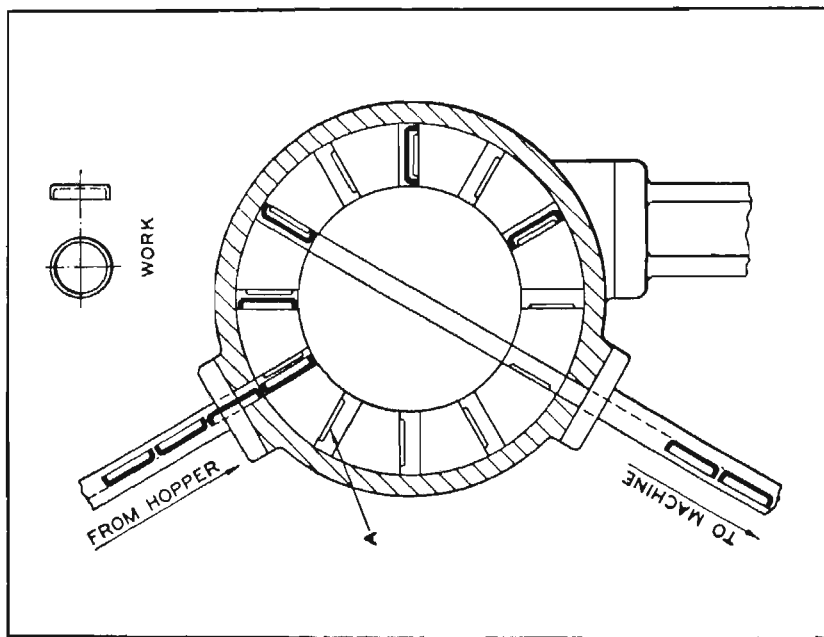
Selector which Holds Incorrectly Positioned Shallow-drawn Parts by Plugs (A) and Prevents them from Being Fed to the Machine.
